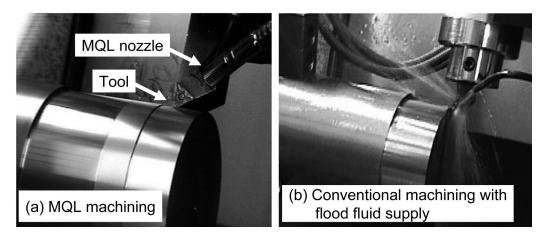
Photographs of Turning by (a) MQL Machining and (b) Conventional Machining with Flood Fluid Supply
